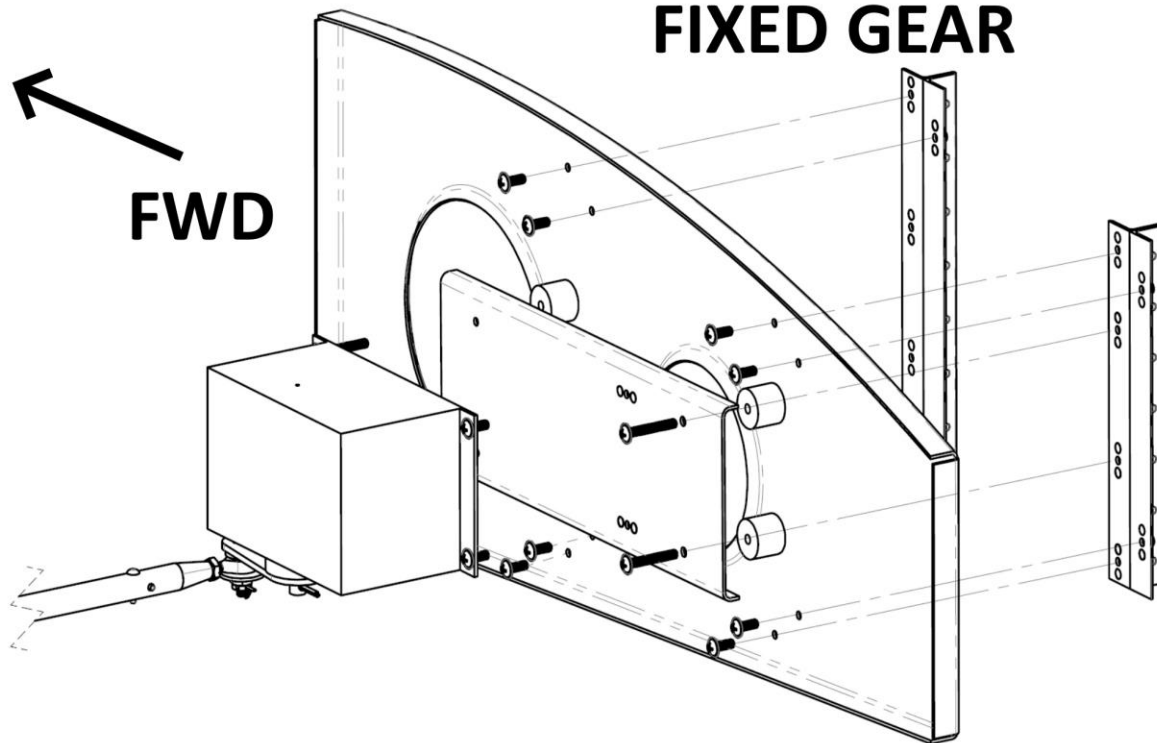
COMMON ROLL SERVO INSTALLATION (EXPLODED VIEW)
